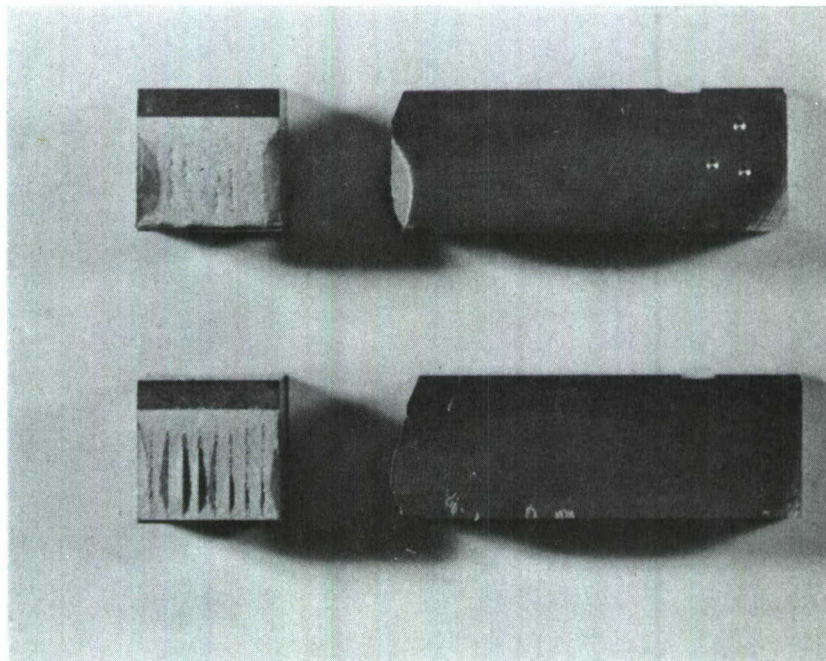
Fracture appearance for enhancer geometry of Billet #2.
